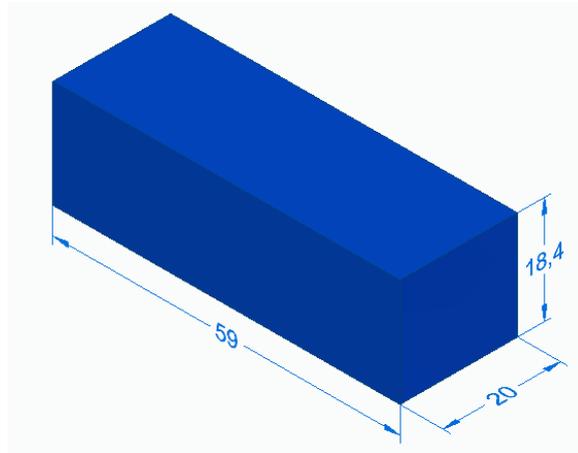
Dimensions in millimeters (mm) of the fuel grain samples.
